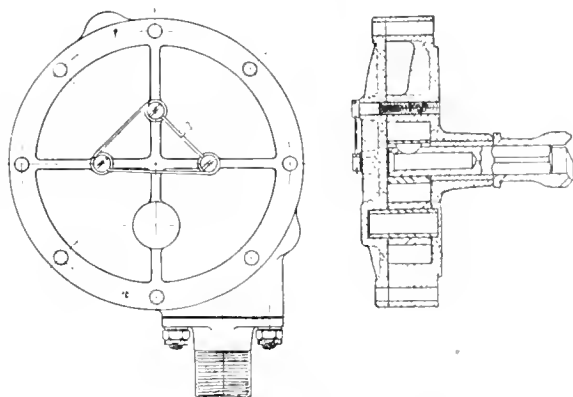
OIL-PRESSURE-PUMP ASSEMBLY
